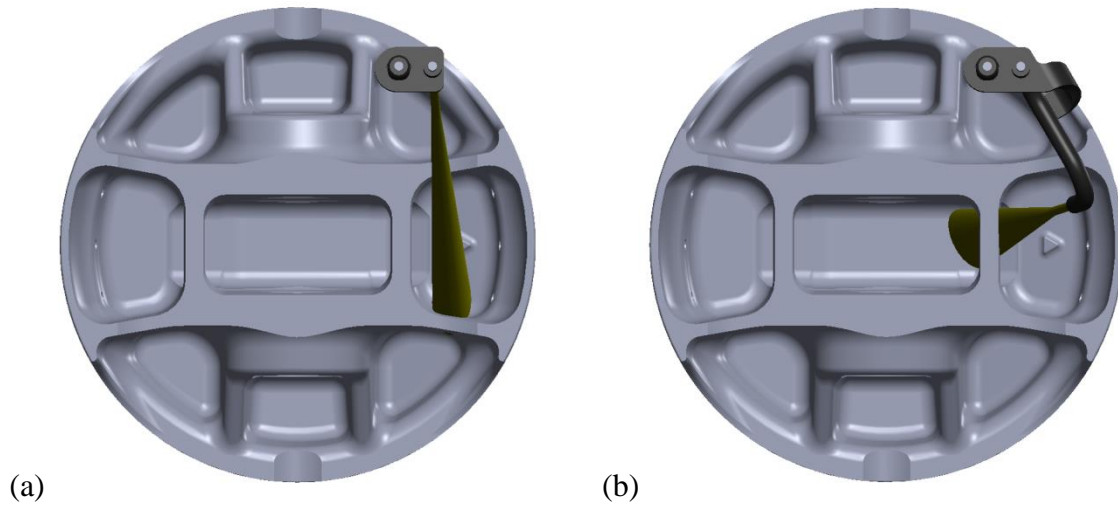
Cooling oil jet hitting the underside piston crown: (a) original oil jet; (b) modified oil jet.
